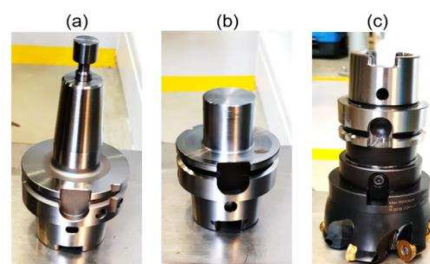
(a) calibration tool; (b) blank tool; (c) face mill (heavy tool).
